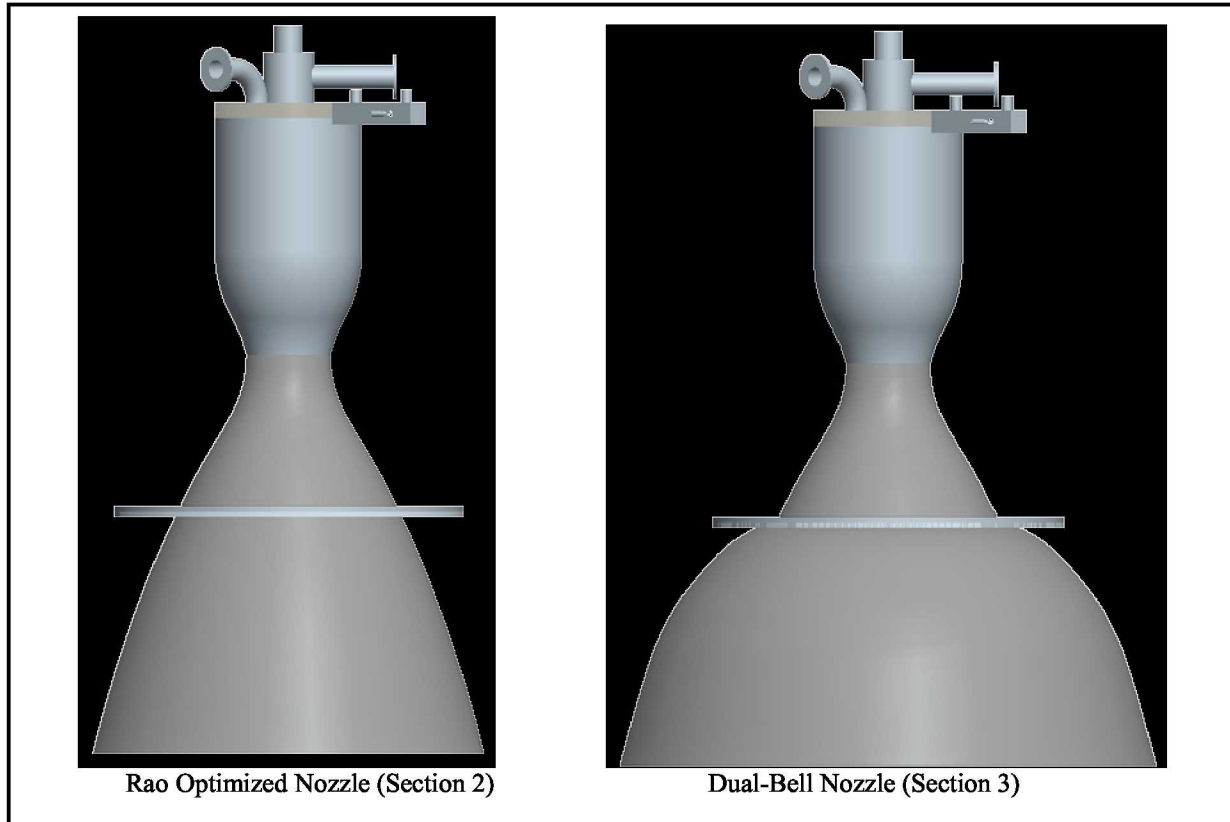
Thrust Chamber with Section 1 and Section 2 or 3 Attachment
